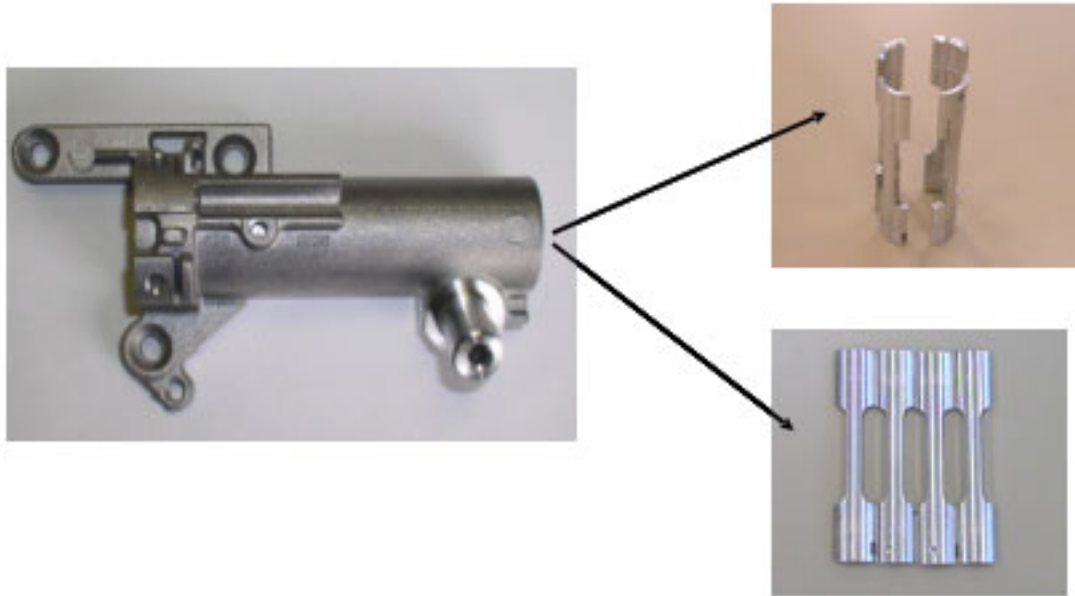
Showing tensile test samples cut from SiBloy® SSM castings.
